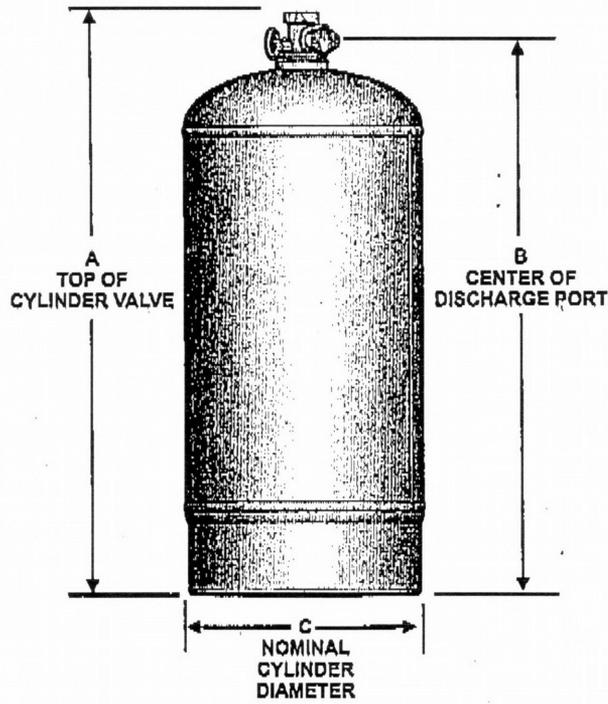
Dimensions of Cylinder and Valve Assembly, P/N B-12XXXX
